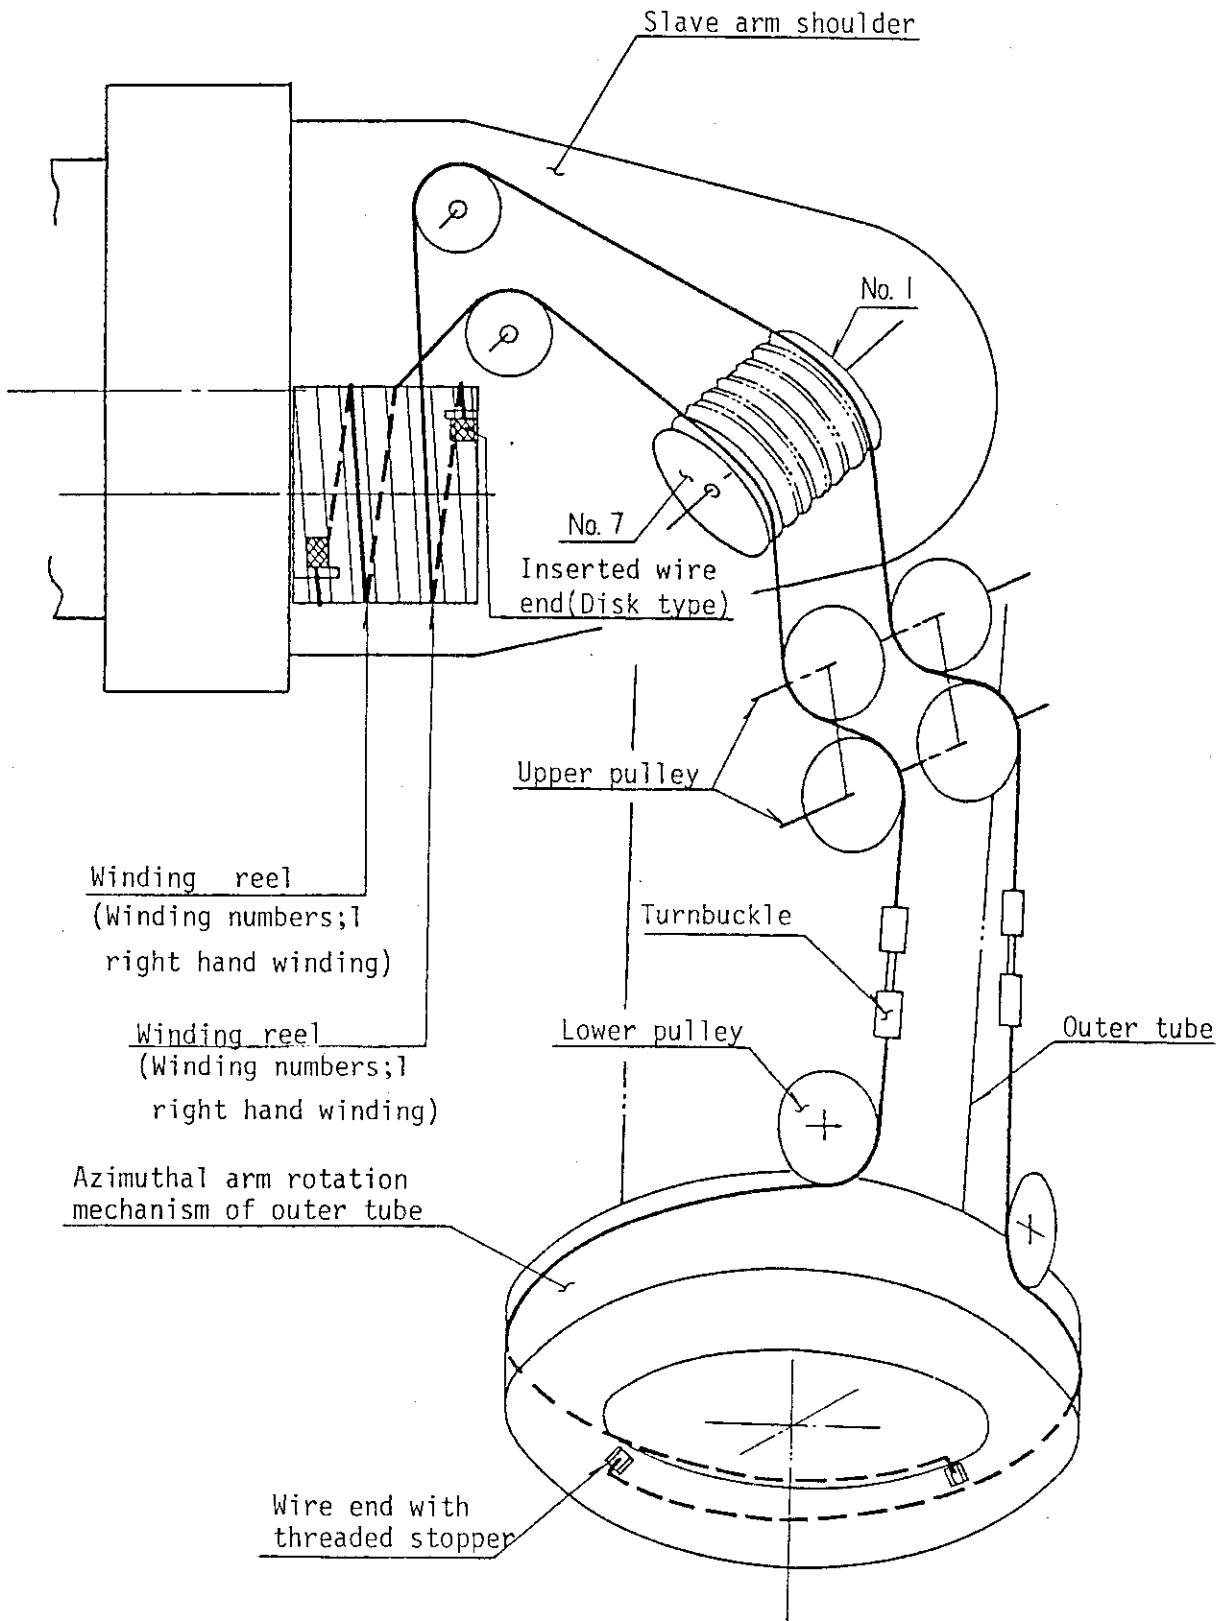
Perspective view of azimuthal master arm rotation mechanism of the type A 100 manipulator
